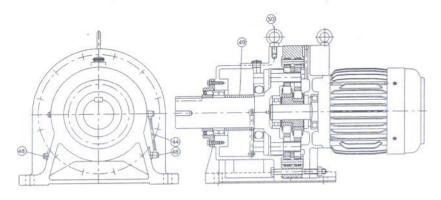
Fig. D Type THM (Horizontal Gearmotor) Single Reduction (Example: Frame size 608)
